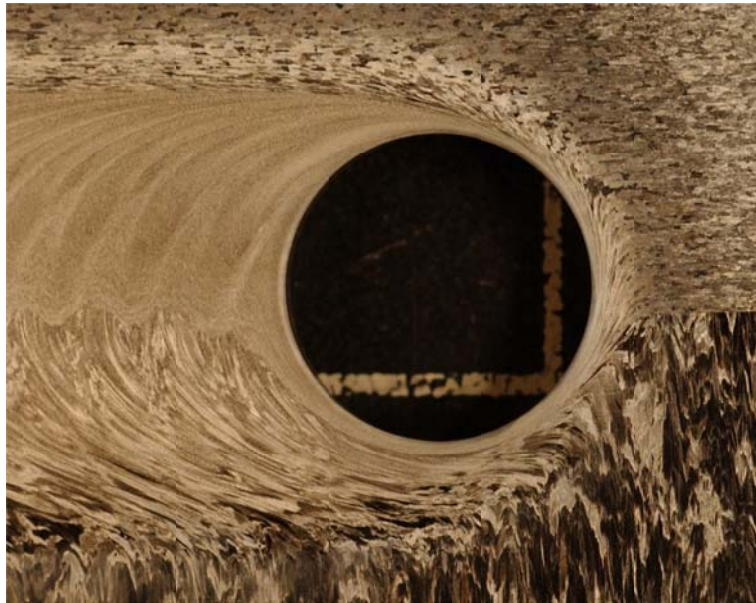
Lateral weld seam oscillation on plan-view of bimetallic FS weld: 2219 aluminum alloy on upper (advancing) side, 2195 on lower (retreating) side courtesy of G. Bjorkman of Lockheed Martin. Pin site (central hole) is 12.7 mm (0.5 inch) in diameter. The straight, unwelded seam on the right of the central hole becomes the wavy, welded seam on the left. While the 2219 metal appears to have entered the shear surface and been subjected to the grain refinement produced by its high shear rate, the 2195 metal appears to have been rotated around the tool in a slower peripheral flow resulting in a broader flow region and retaining more of the parent metal structural features.
